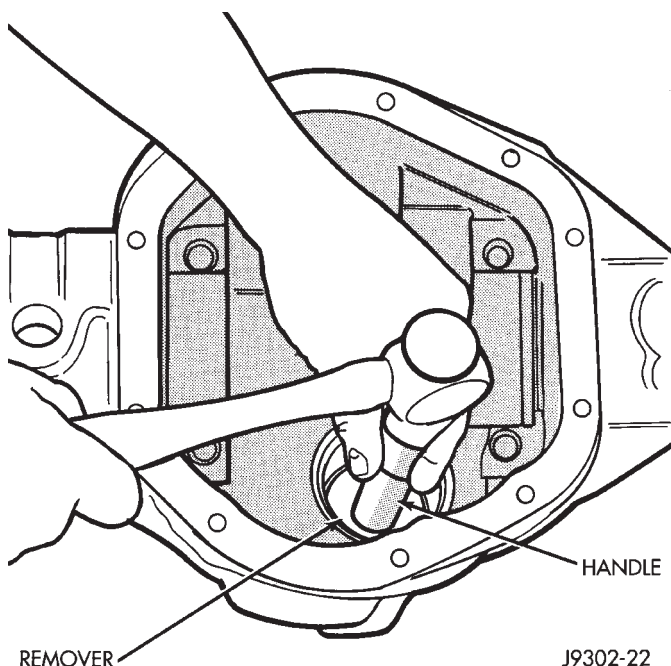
Front Bearing Cup Removal—8 1/4 Axle
